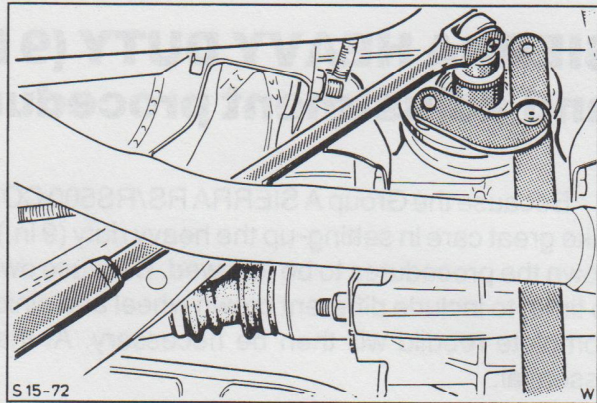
Hold drive flange with special tool and tighten flange nut.
